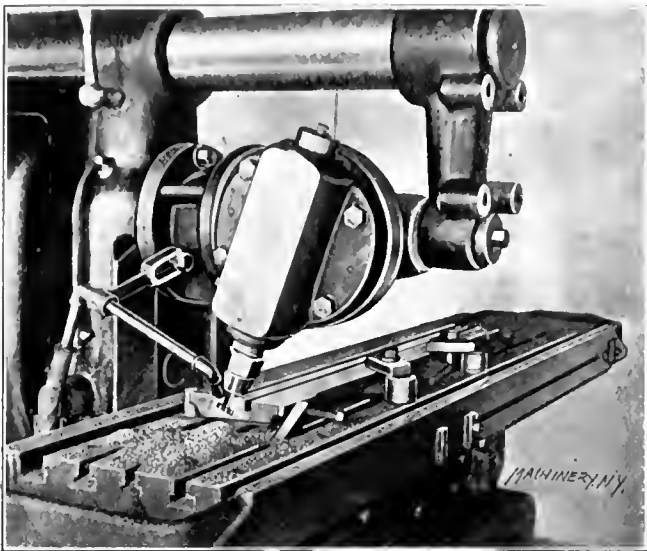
The Universal Milling Attachment cutting an Inclined Slot.
